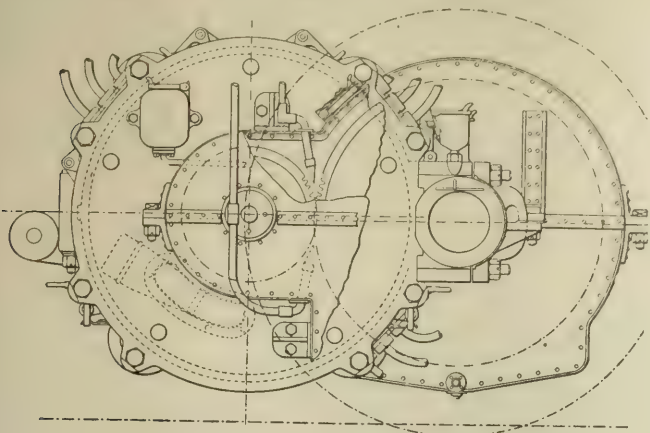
ELEVATION OF MOTOR AND GEAR CASE.
